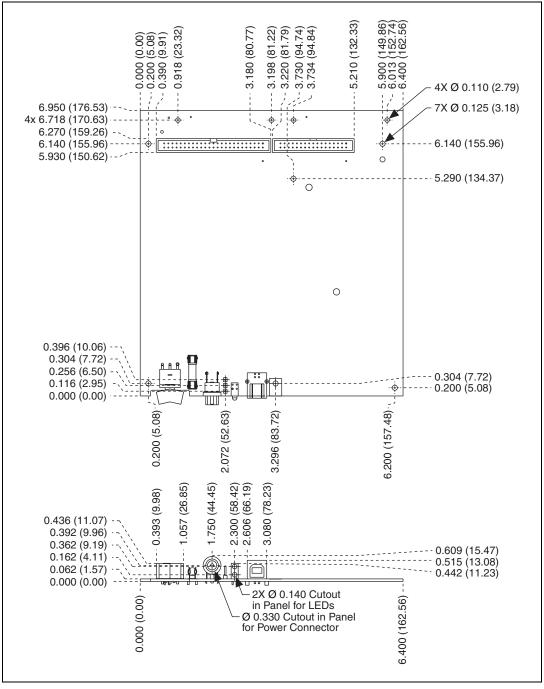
USB-6221/6251/6281 OEM Dimensions in Inches (Millimeters)
